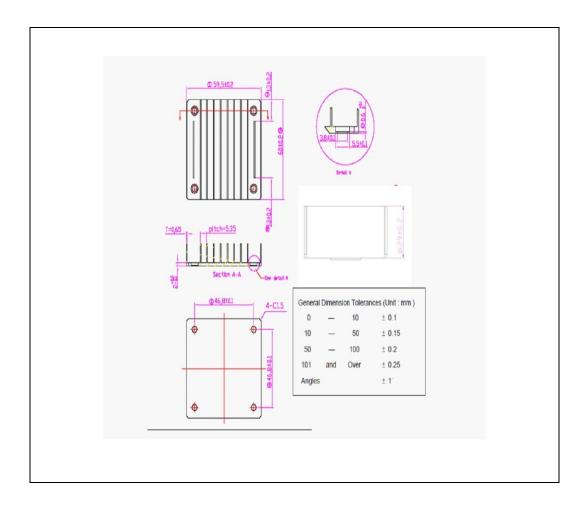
1U Natural Convection Heatsink Mechanical Drawing
